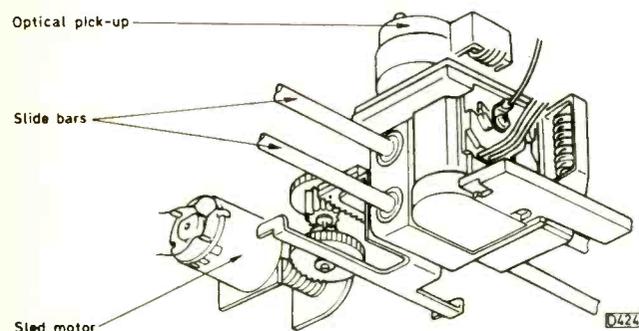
Typical optical sled assembly, showing the slide bars, gears and drive motor. In some cases the motor may be coupled to the gears via a belt.
